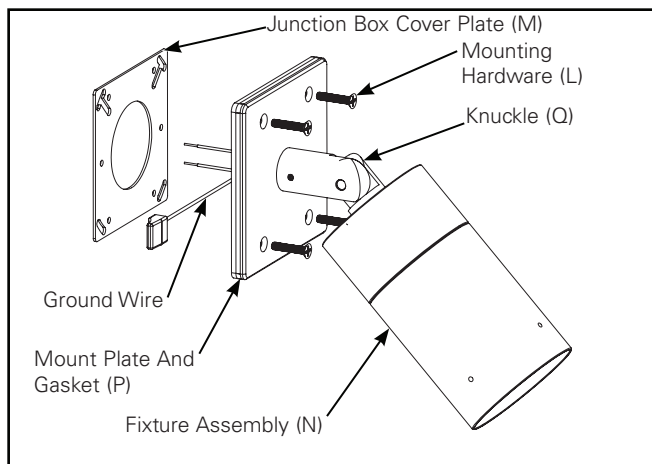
FIXTURE ASSEMBLY 1000-A1-WRS VERSION
